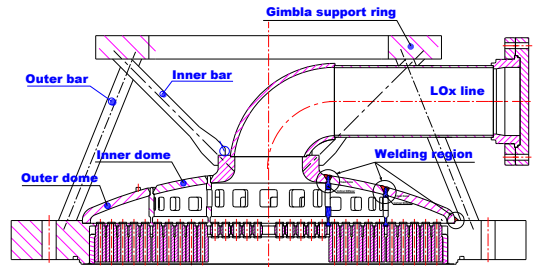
Section View of 75 tonf Class Thrust Chamber Mixing Head
